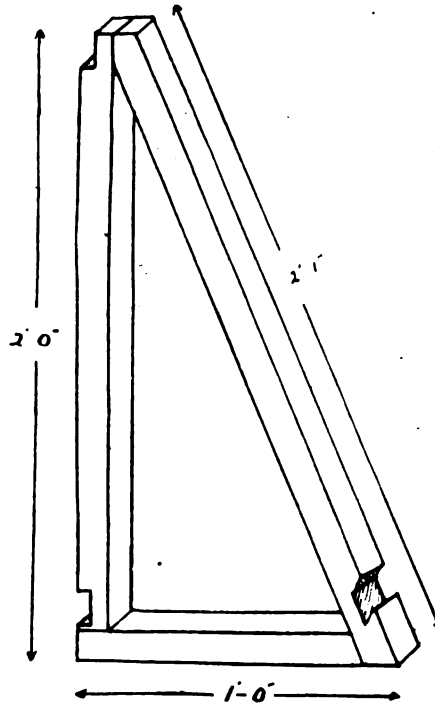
Showing shape of stand and position of crossbars. Shaded parts show joints. Joints are screwed together.
